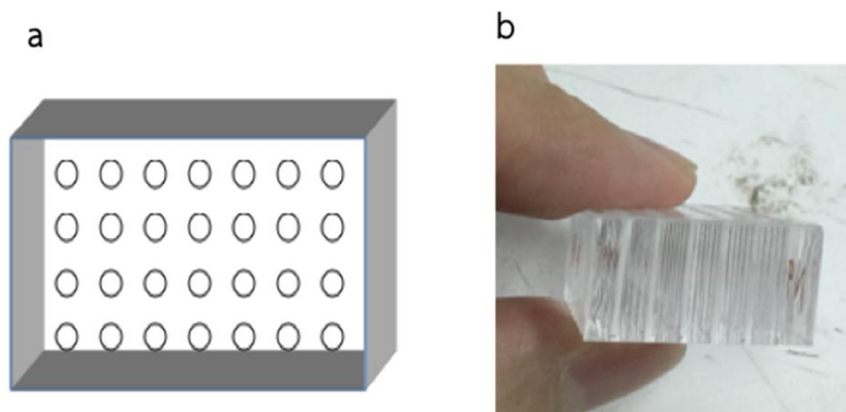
3D Drawing (a) and acrylic master mold box (b)
